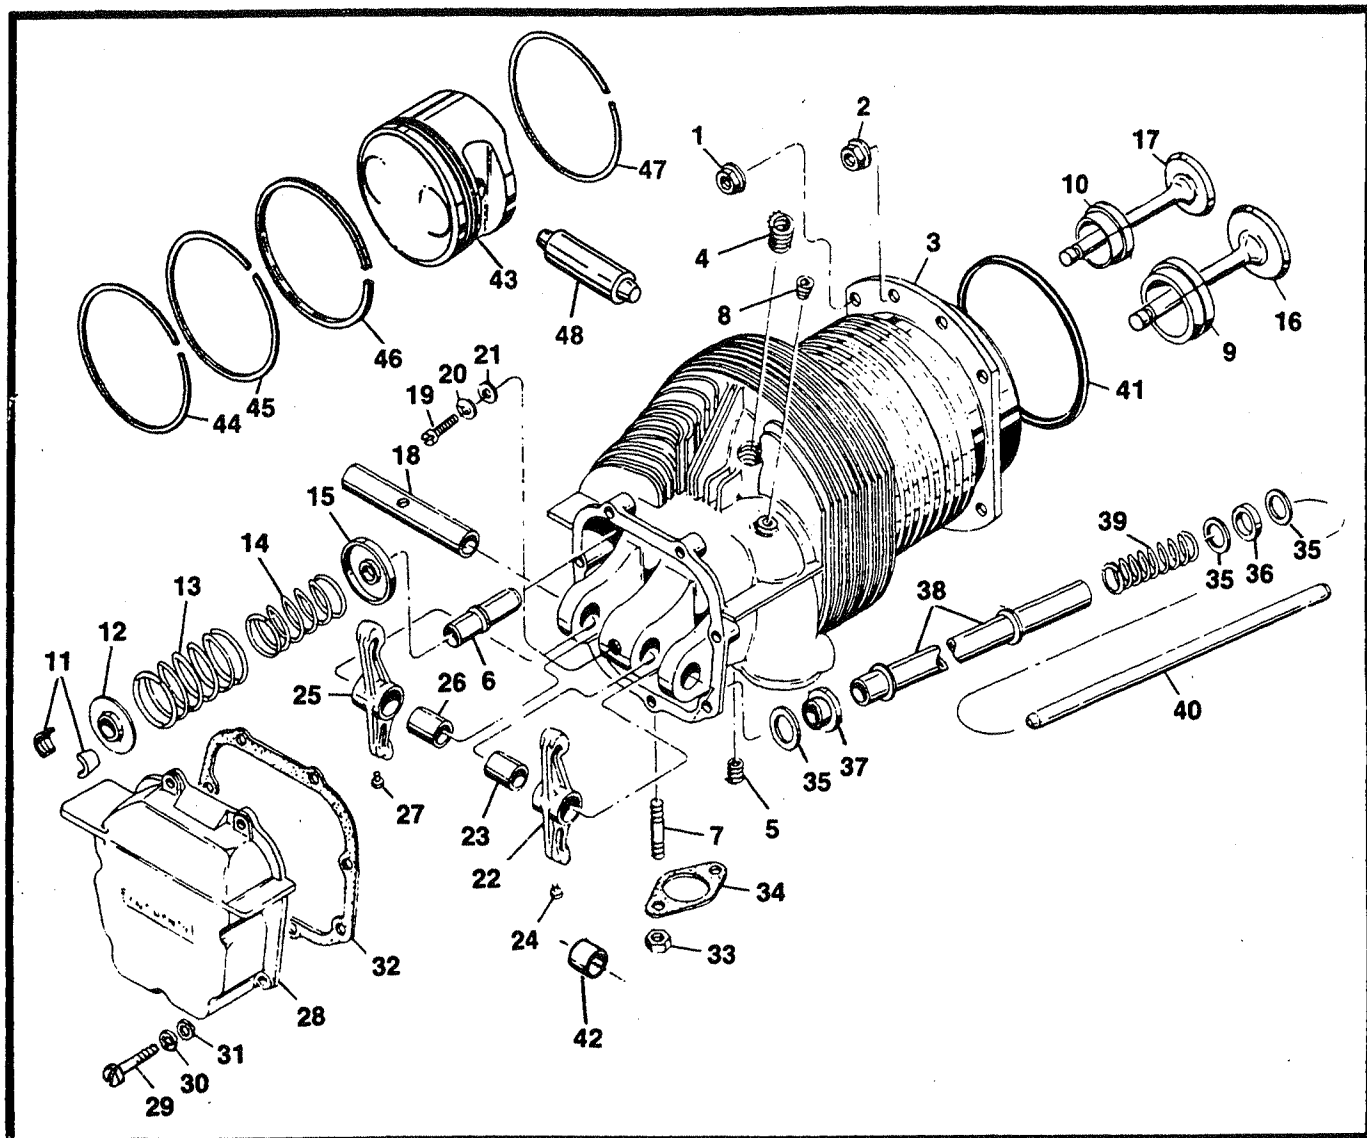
B. CYLINDER ASSEMBLY (STRAIGHT VALVE) O-470-A,E,J.
